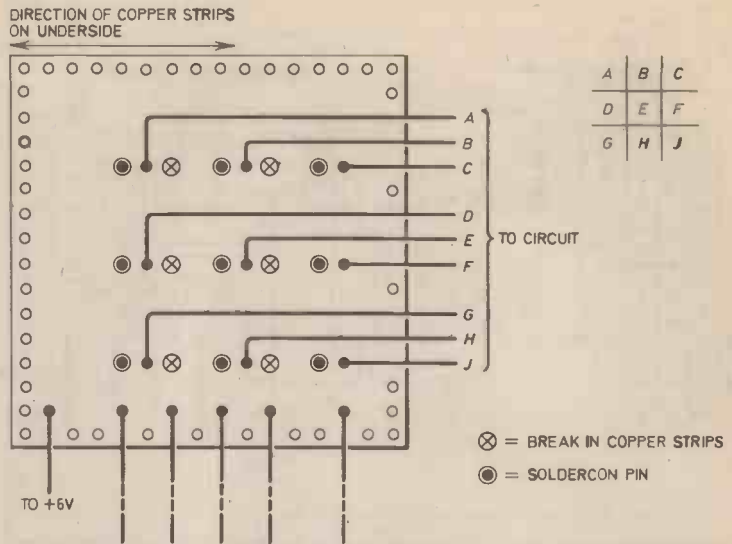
Construction of a "pin board" using a piece of stripboard. The lettering of the squares is shown in the inset. The wires at the bottom of the board are used to make the moves by pushing onto the pins.
